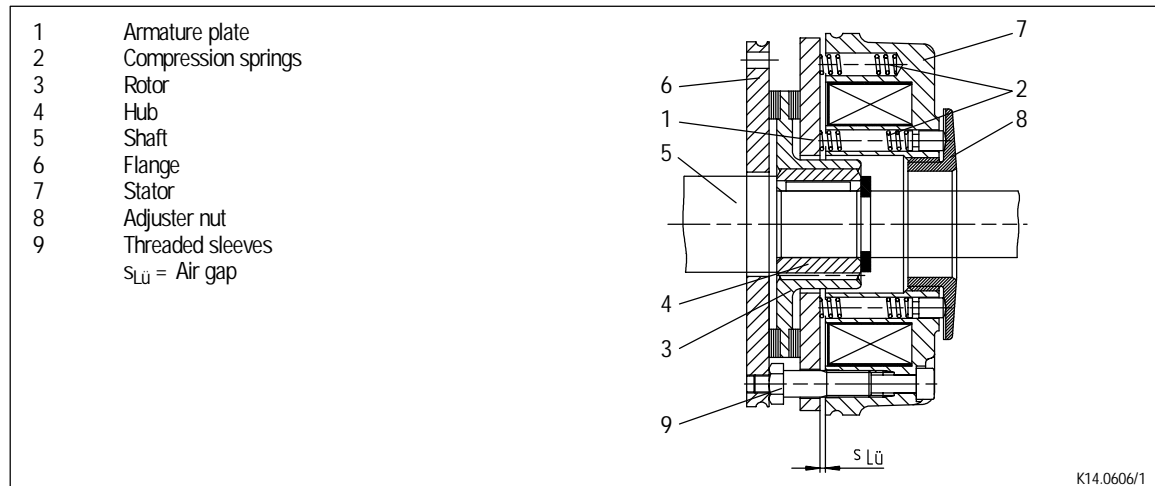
Design of the spring-operated brake BFK458: basic module E (complete stator) + rotor + hub + flange
